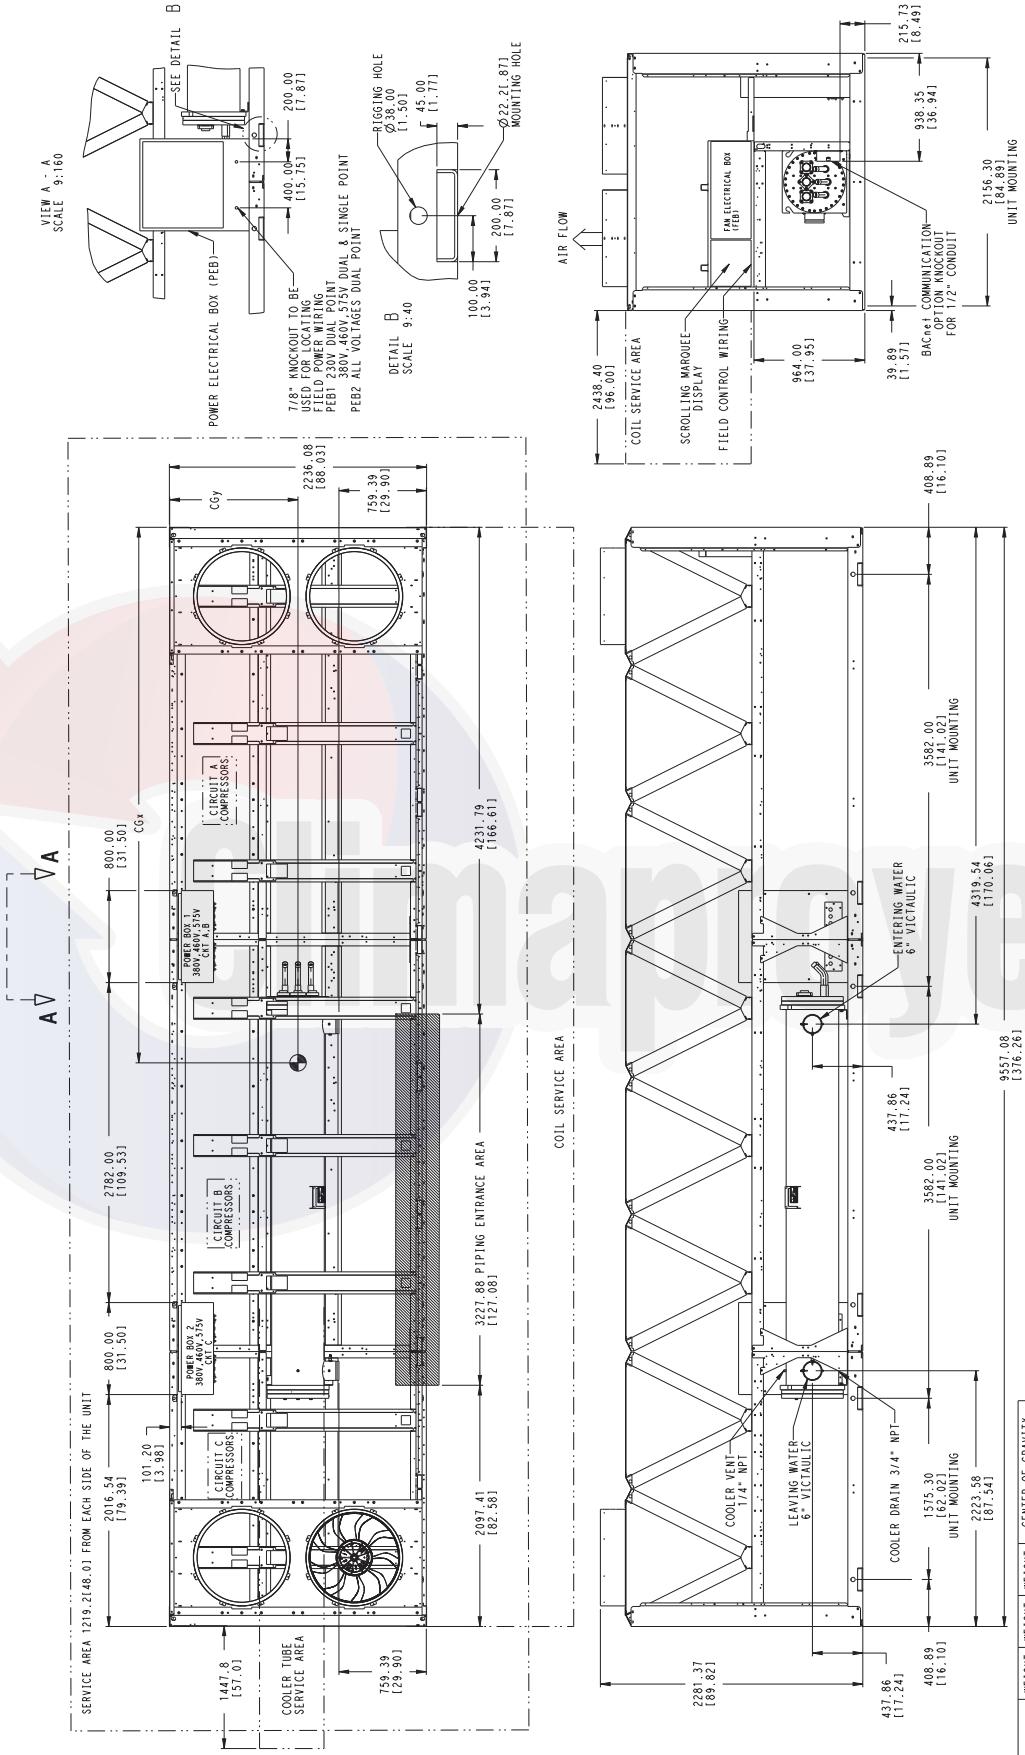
30RB250 Air-Cooled Chiller Dimensions
